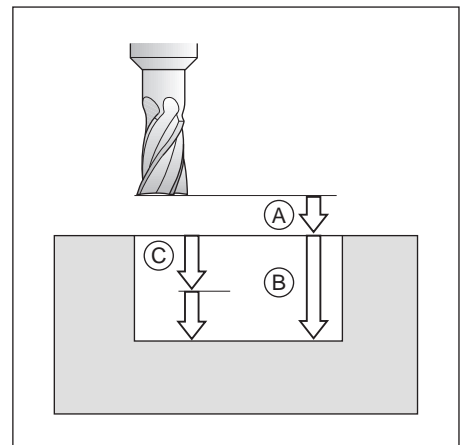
Infeeds and distances for the SLOT MILLING cycle
